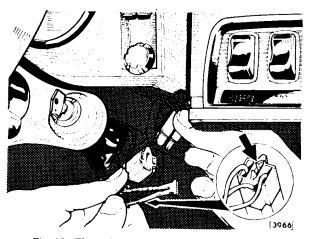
The tachometer plug and socket assembly. (Inset shows the clip in its fitted position).
